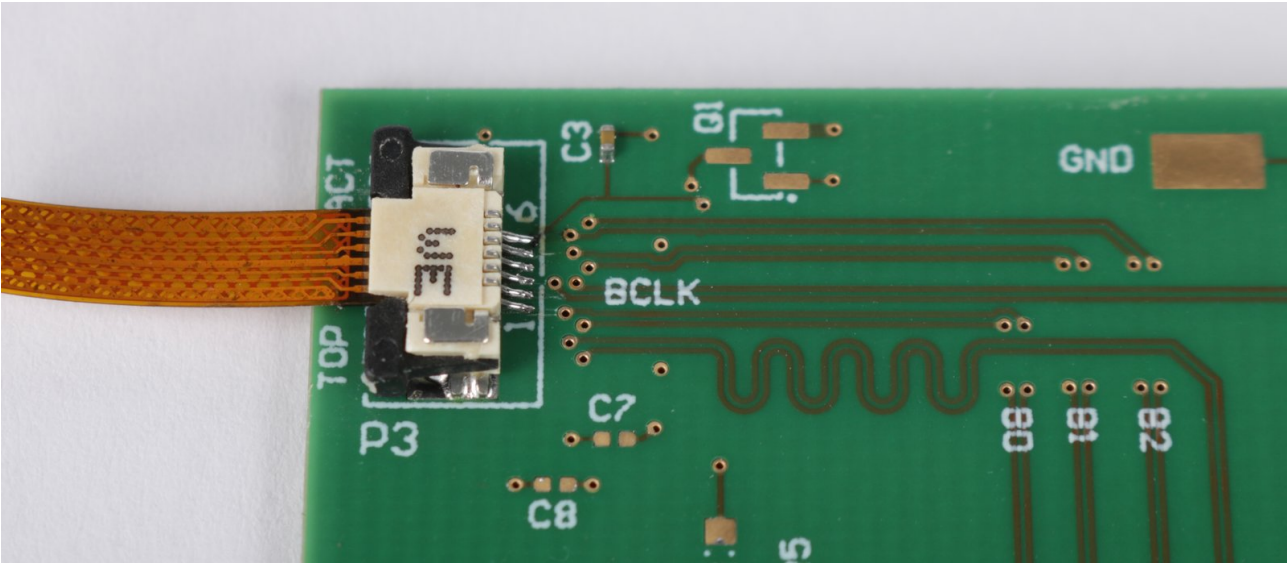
Connector P3 (I2C / Touch) on the DSI adapter PCB
